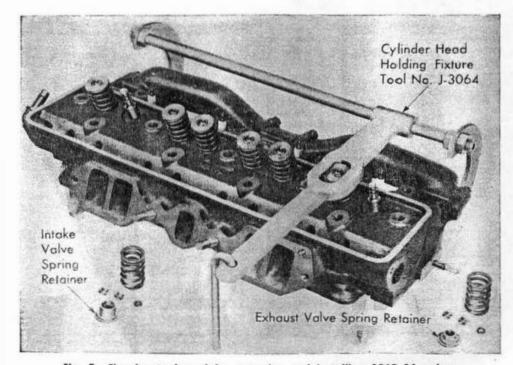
Showing tool used for removing and installing 1949-54 valves
